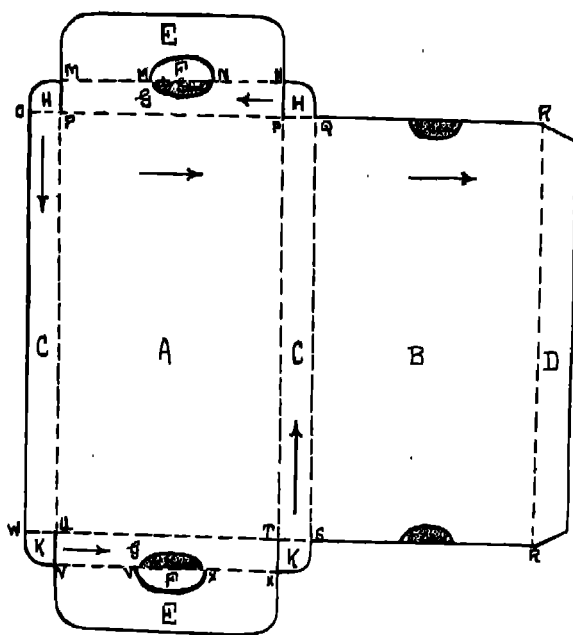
SINGLE-PIECE MODEL FOR PHOTOGRAPHIC FILM PACKS.
